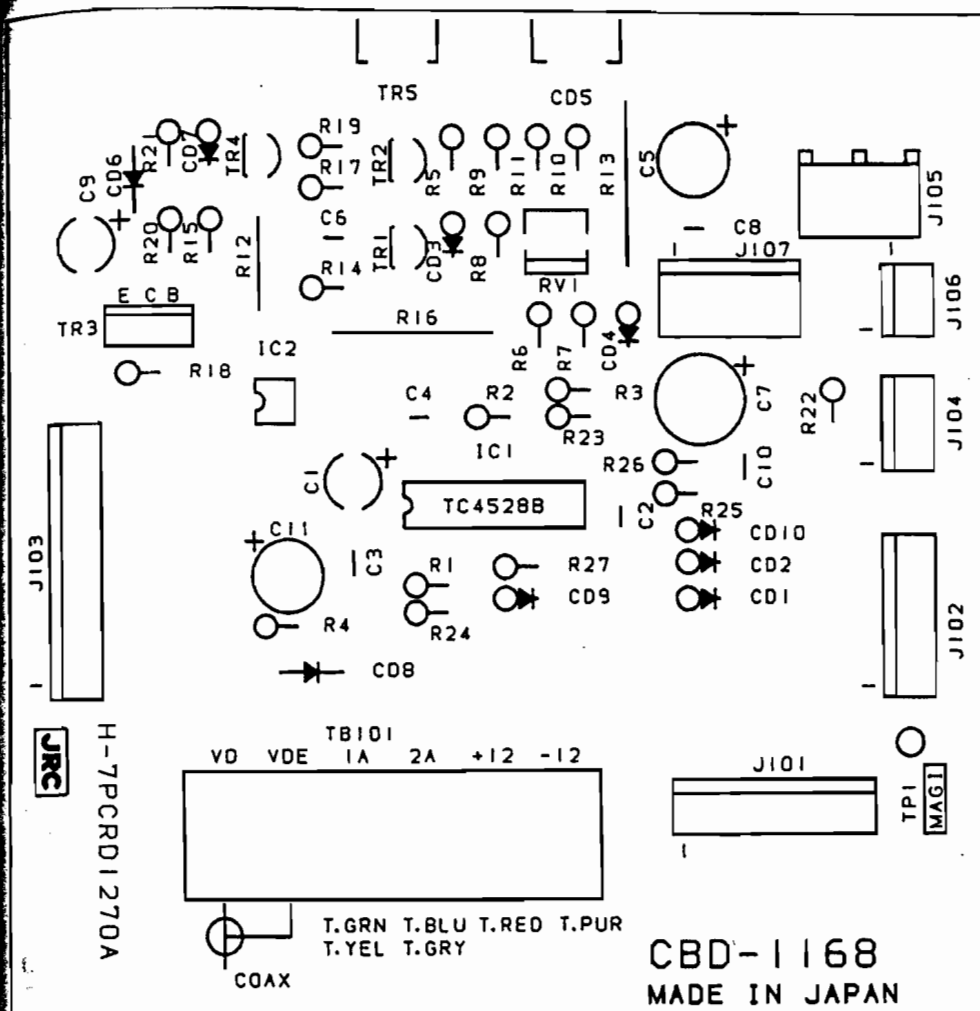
COMPONENT LOCATION DRAWING, R21XX TERMINAL PCB (CBD-1168)
